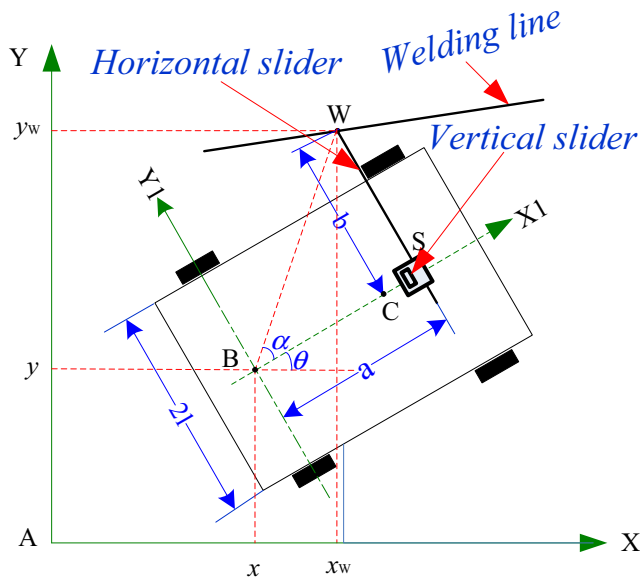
Kinematic scheme of the mobile welding robot
